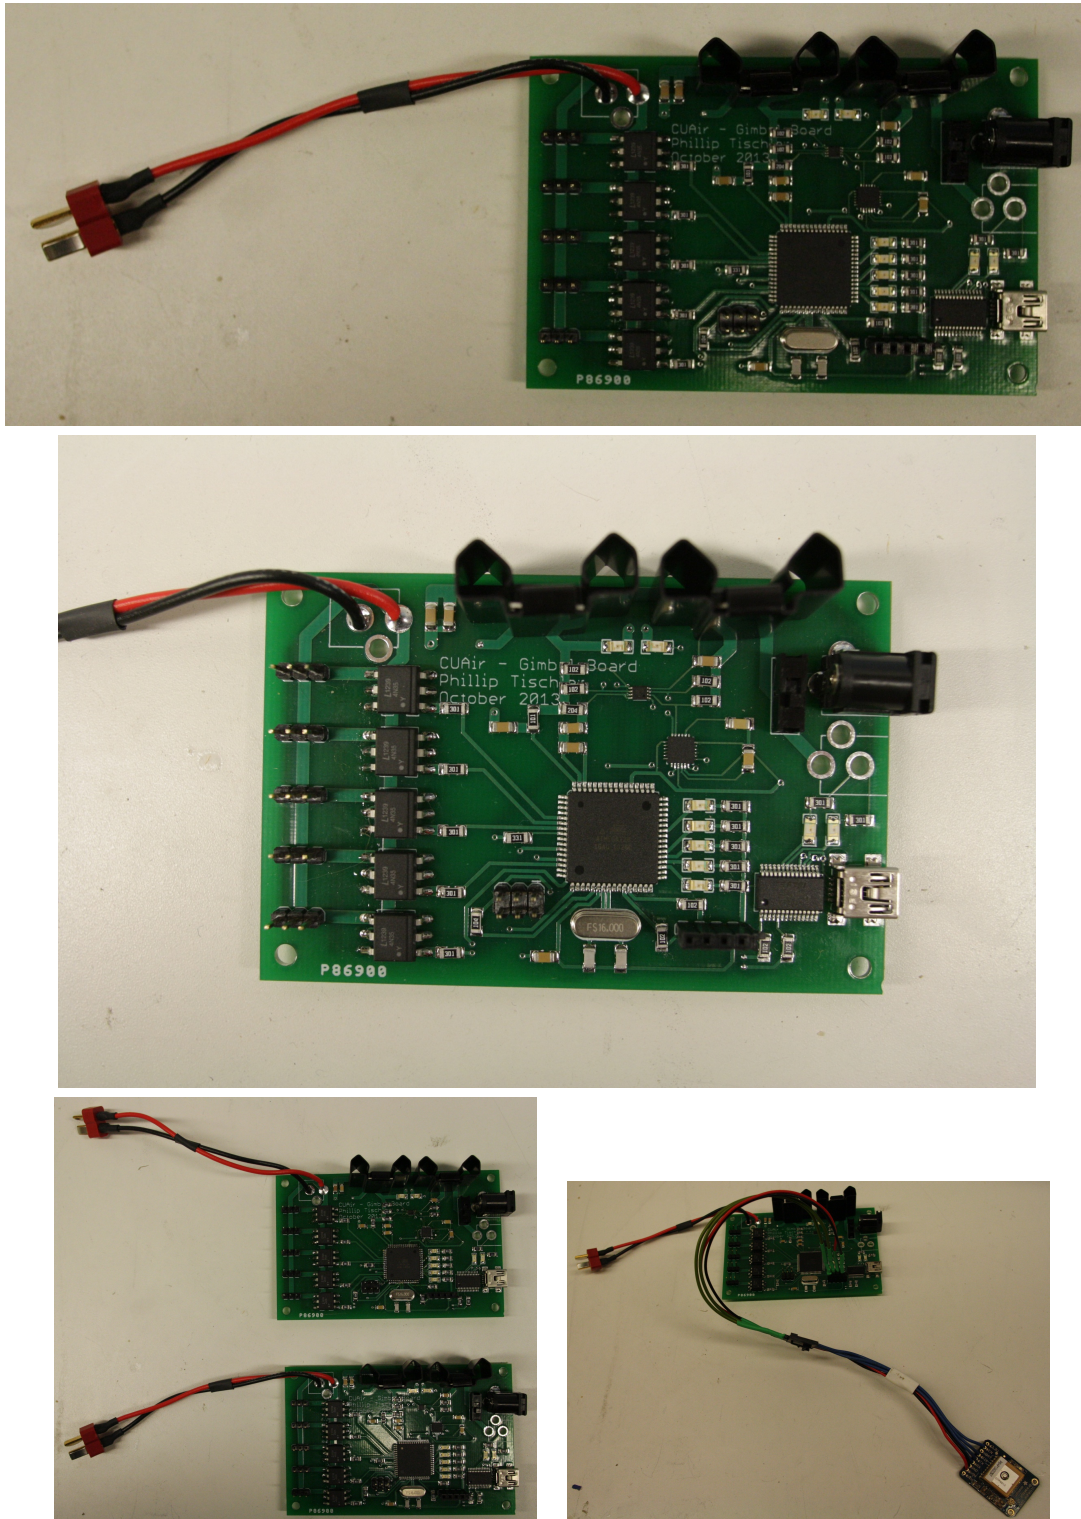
The Gimbal Control Board PCB Manufactured Boards and Reflow Assembly Images. The top image shows the board after the initial reflow and hand soldering process. The second image is a close-up of the board after it was completed. The third image shows how two boards were fully assembled. The final image shows the board with the GPS module connected.
